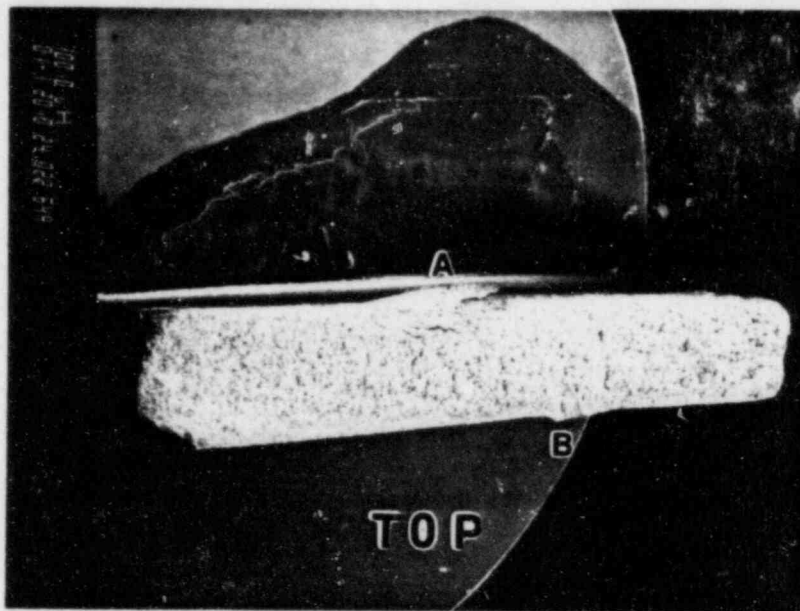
SEM Fractograph of In Situ Fracture "A" in Spring DB-5.
